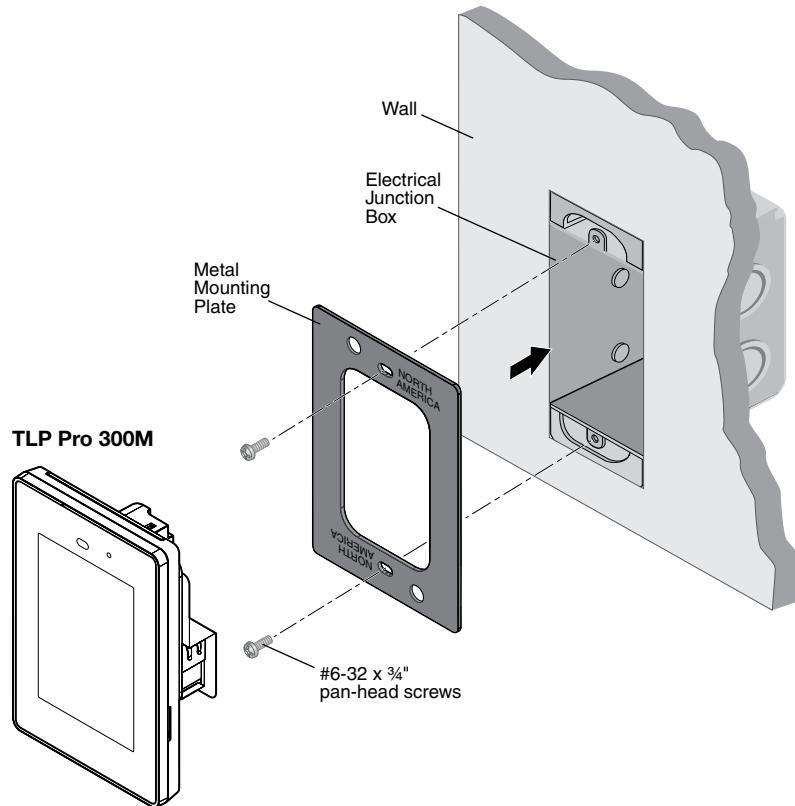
Mounting the TLP Pro 300M to a UL-listed Electrical Box
